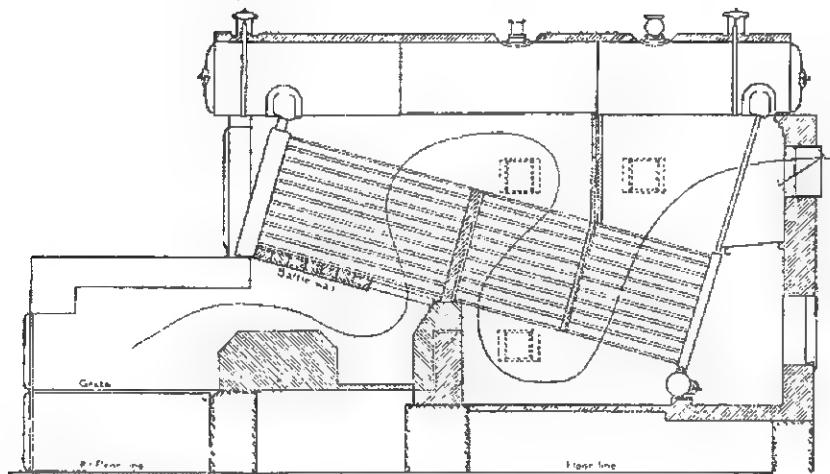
IDEAL SECTION SHOWING ADDITIONAL BAFFLE WALL AND AN ELONGATED FIRE BOX.
